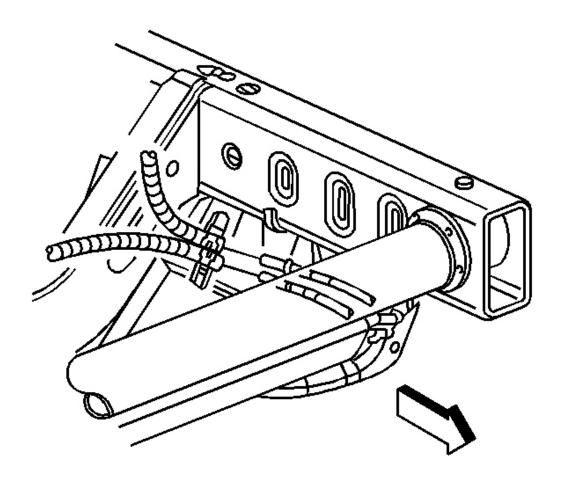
View Of Power Steering Hose Assembly At Power Steering Cooler Courtesy of GENERAL MOTORS CORP.
